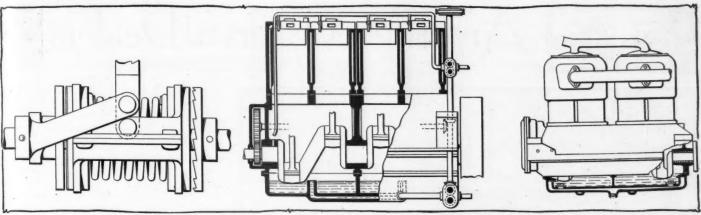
COFFIN'S ROTARY-VALVE MOTOR FIG. 5-PACKARD CRANKCASE CONSTRUCTION -WILLIAMS' ENGINE-STARTER
